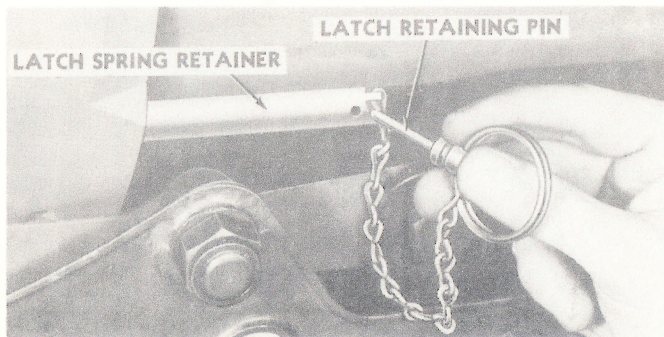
Inserting latch retaining pin into latch spring retainer.
